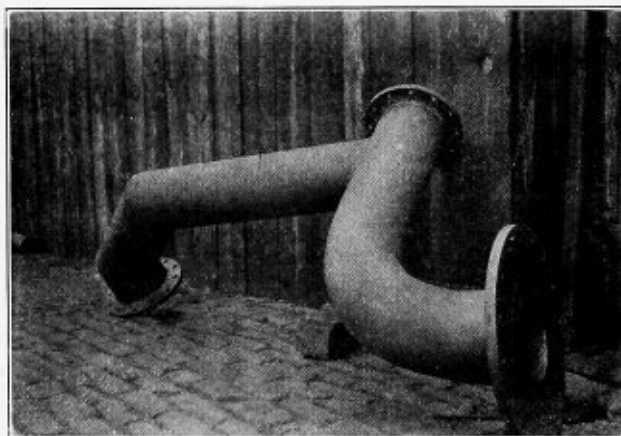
Twisted Pipe, With Joints Welded
